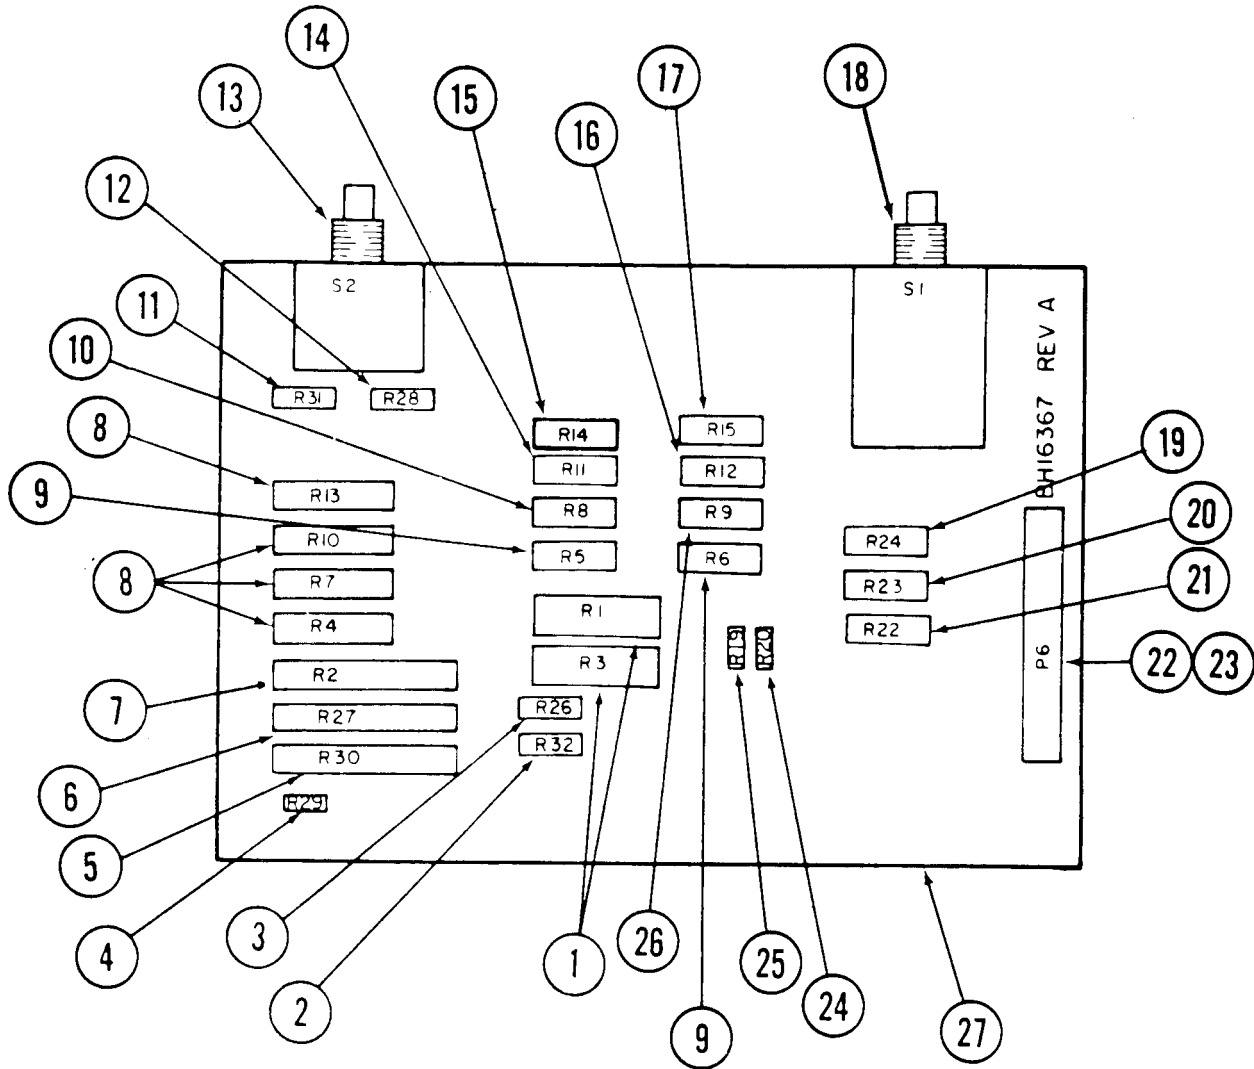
BH16367-3 Resistance-Insulation Circuit Board Assembly
